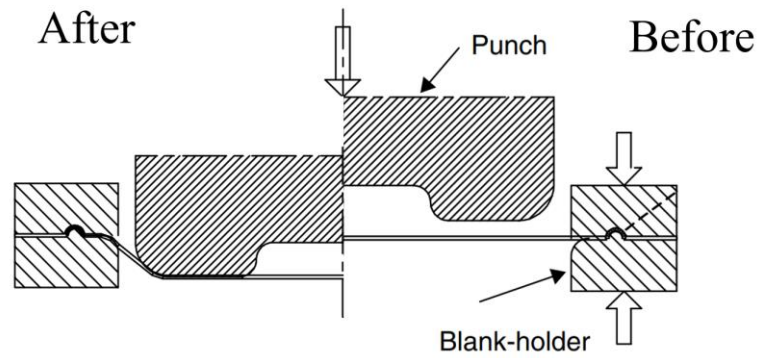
Schematic illustration of sheet metal forming (reprinted from [3])
